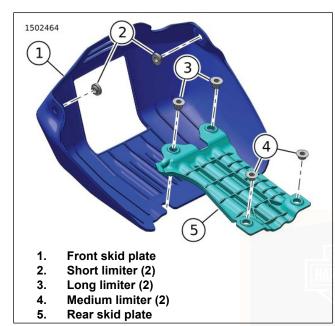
Two Piece Skid Plate - Front and Rear Limiters
